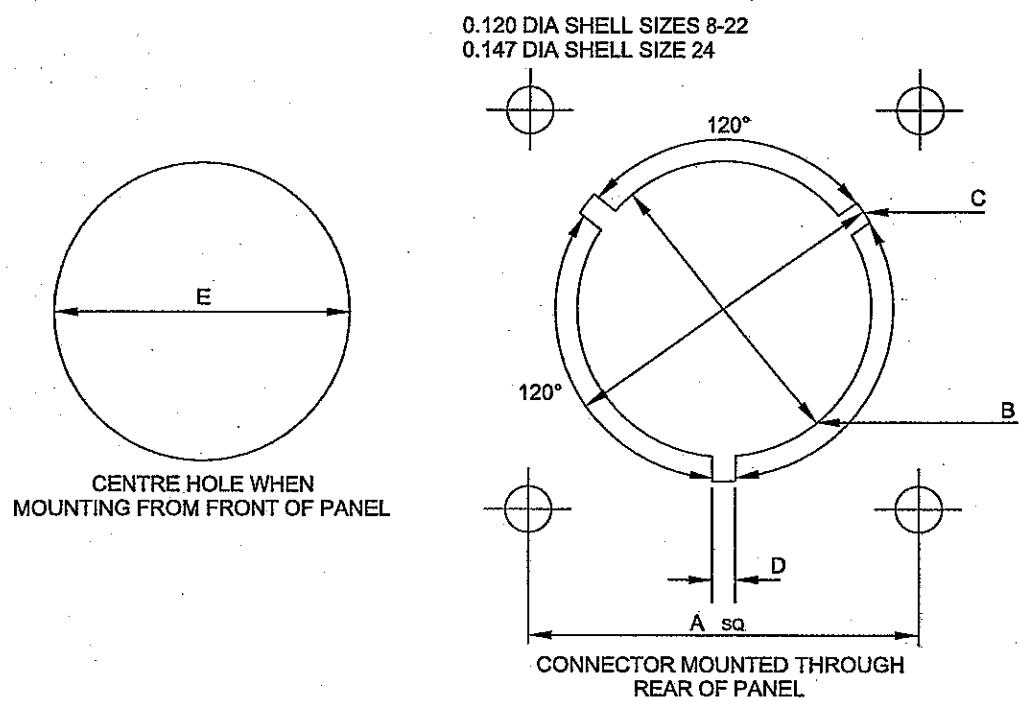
460 Square flange receptacle, panel cut-out dimensions
